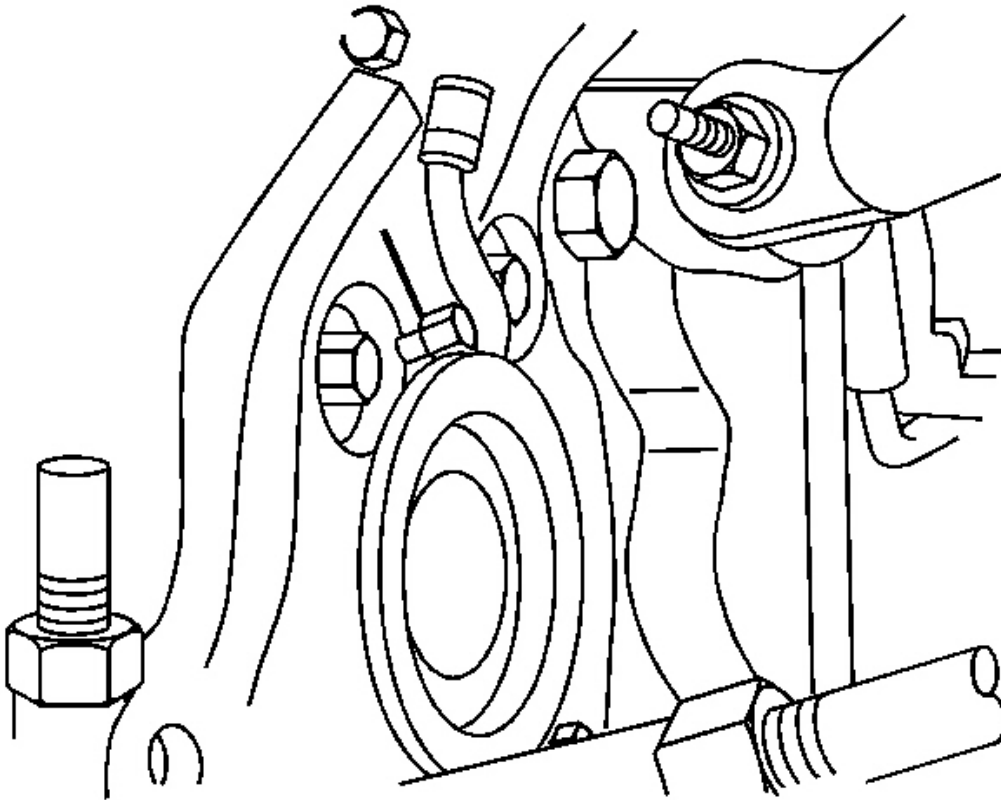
Marking Location Of Speed Sensor Wiring Harness To Steering Knuckle
